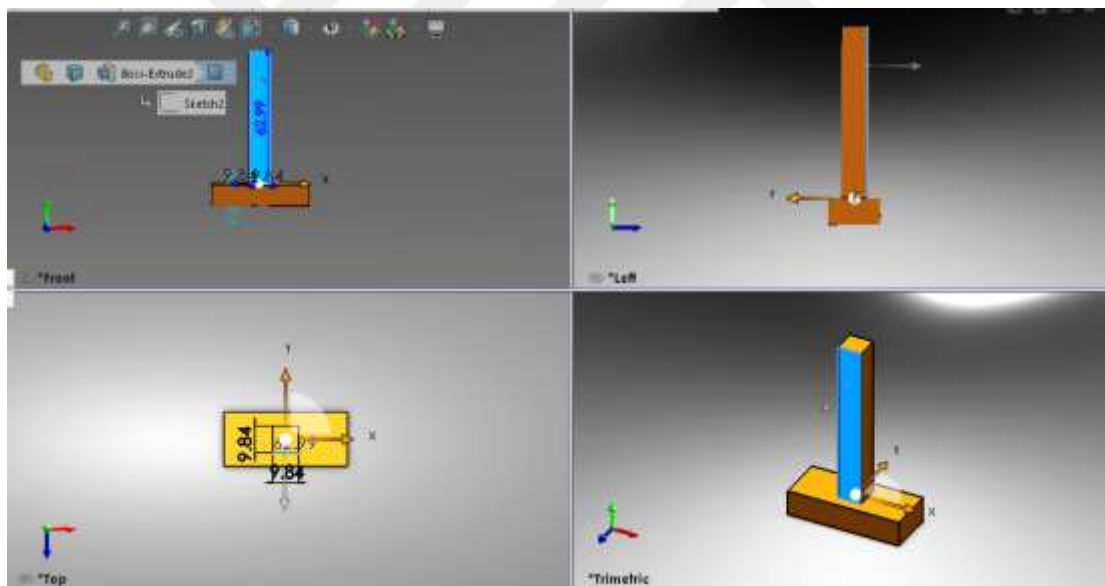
The Dimensions of The First Case Using SolidWork.
